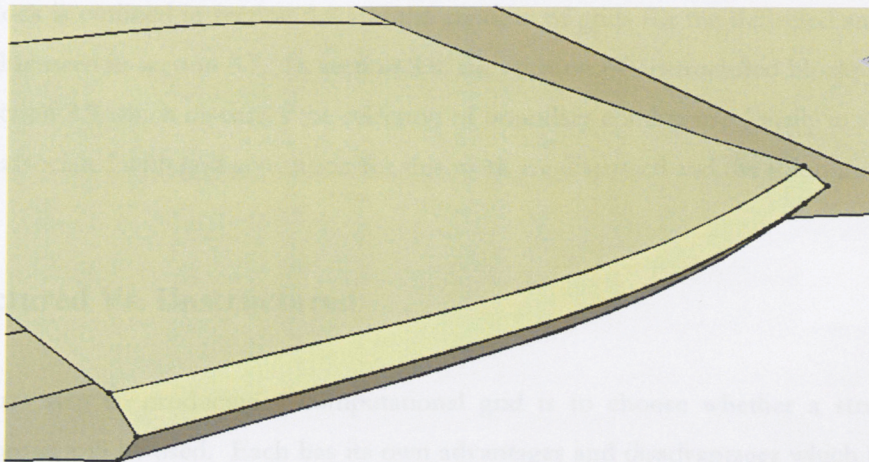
Isometric view of modified inboard elevon with 60° beveled trailing edge.
